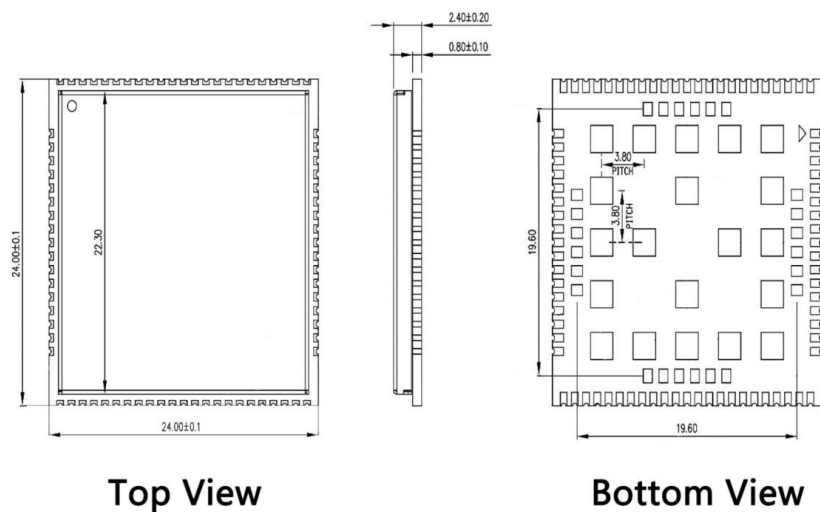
Module Front and Bottom Views (Unit: Millimeters)
